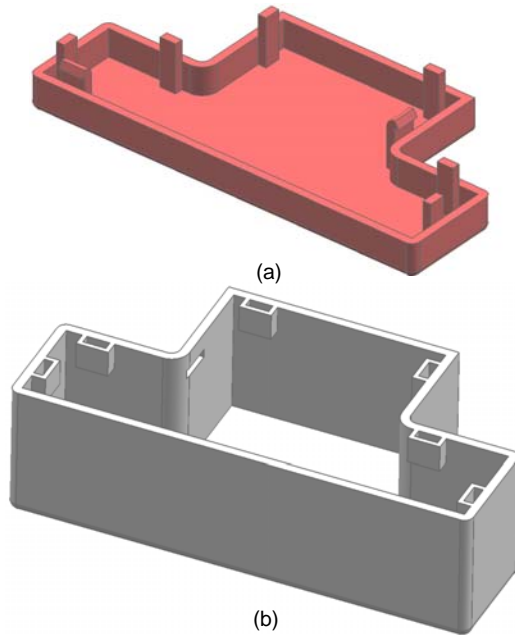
CAD drawing for the optimized DVD player model (solution 1) (a) top part, (b) base part.
